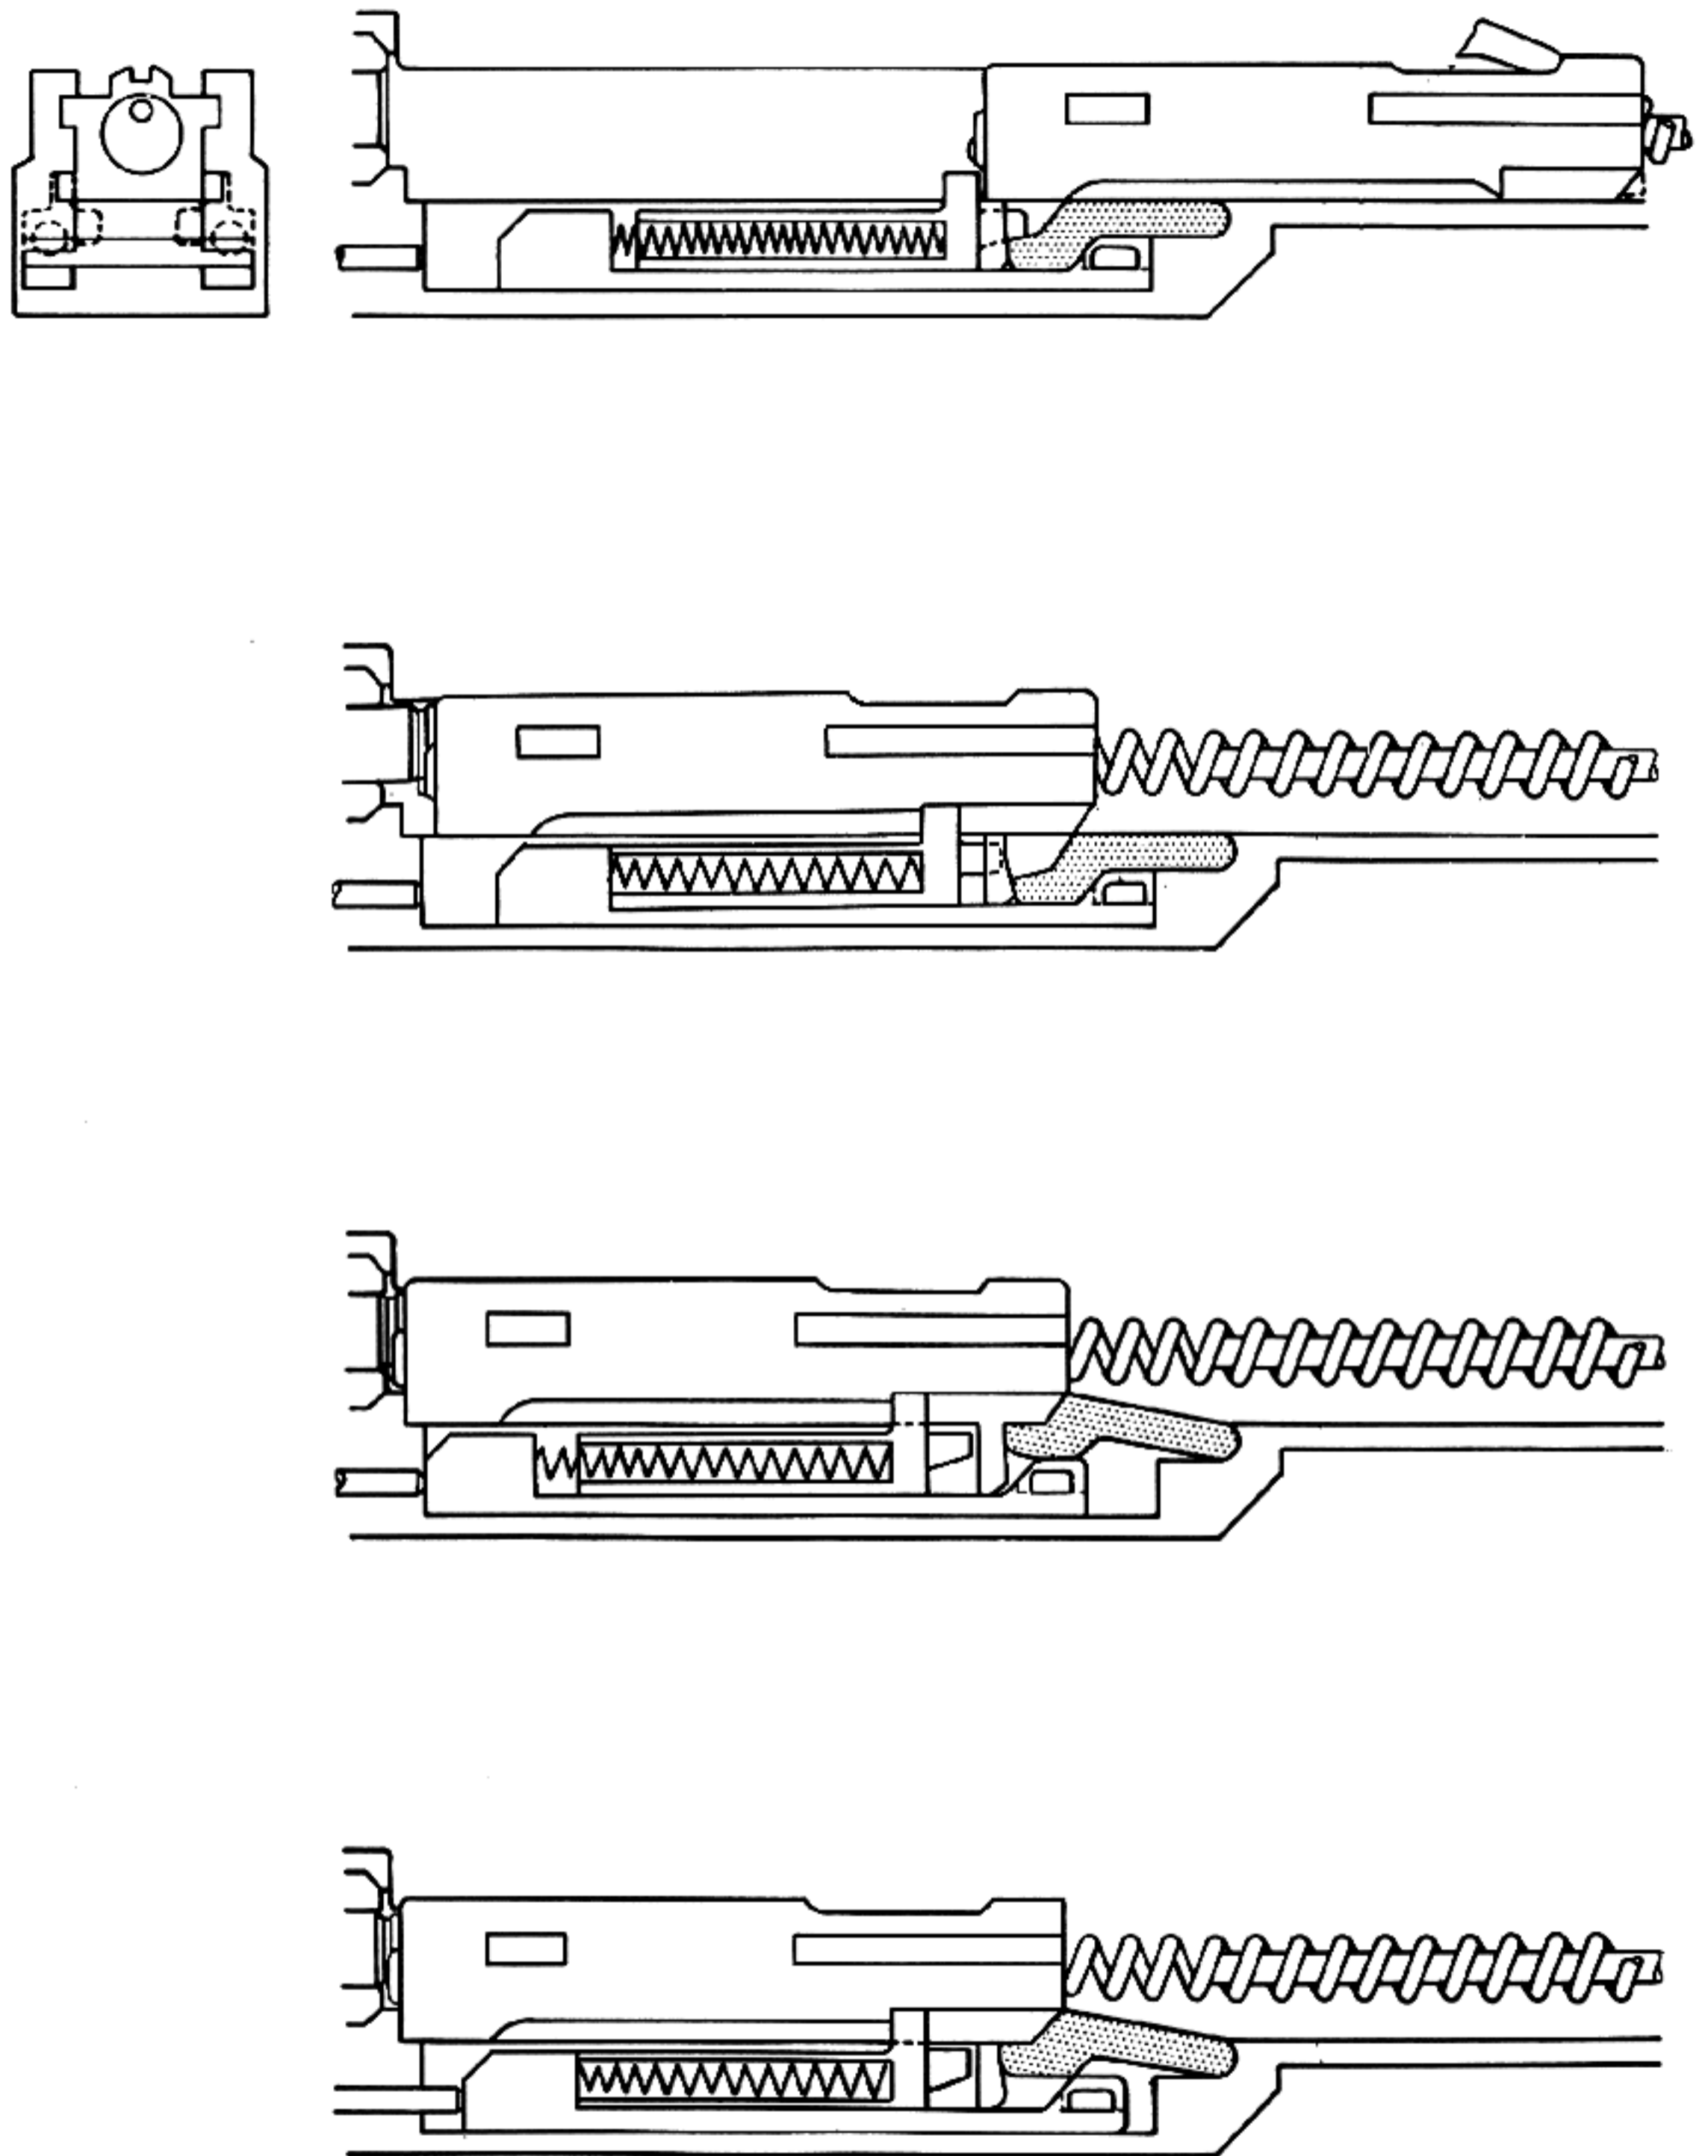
Locking action of 20-mm Automatic Gun 5TG. Top to bottom: bolt cocked; bolt advances; lock rises; unlocking commences.
